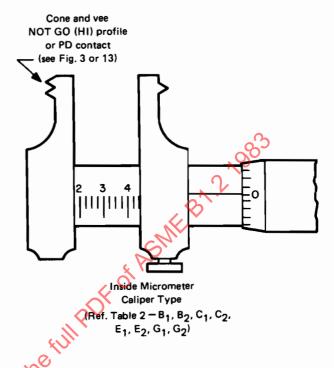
INSIDE MICROMETER, CALIPER TYPE
